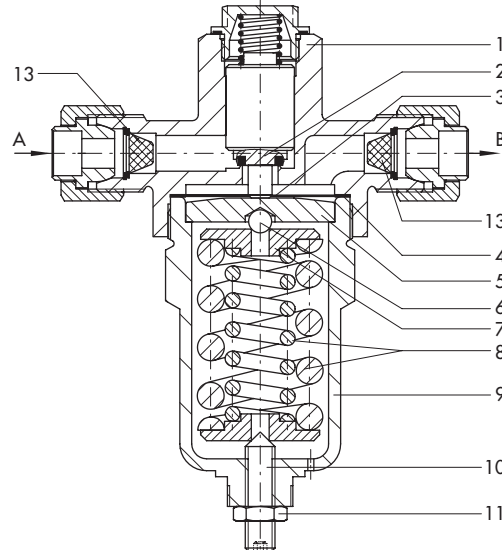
· Type 2357-1/6 Pressure Reducing Valve or Pressure Build-up Regulator
